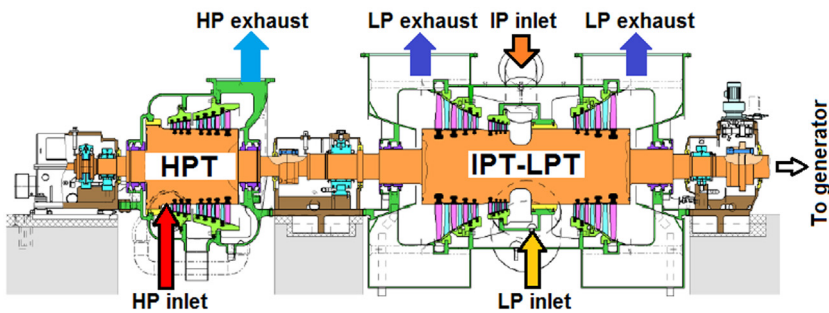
Cross-section of Fuji steam turbine assembly for Kızıldere Unit 2 power plant. After Ref. [17] [WWW].
